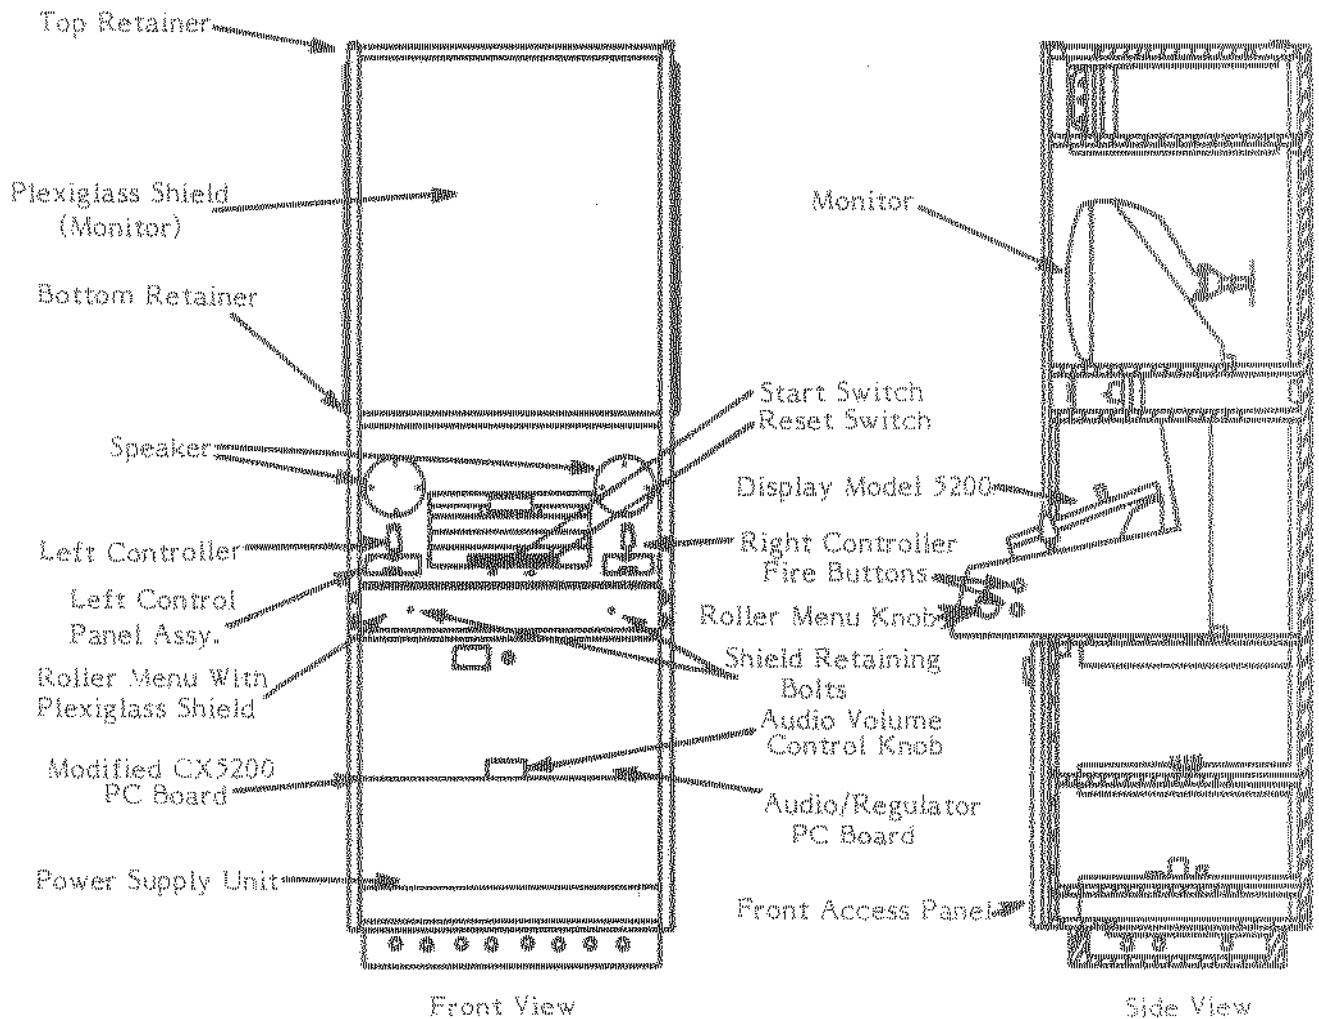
CX5200 Retail Demonstrator Assembly.
